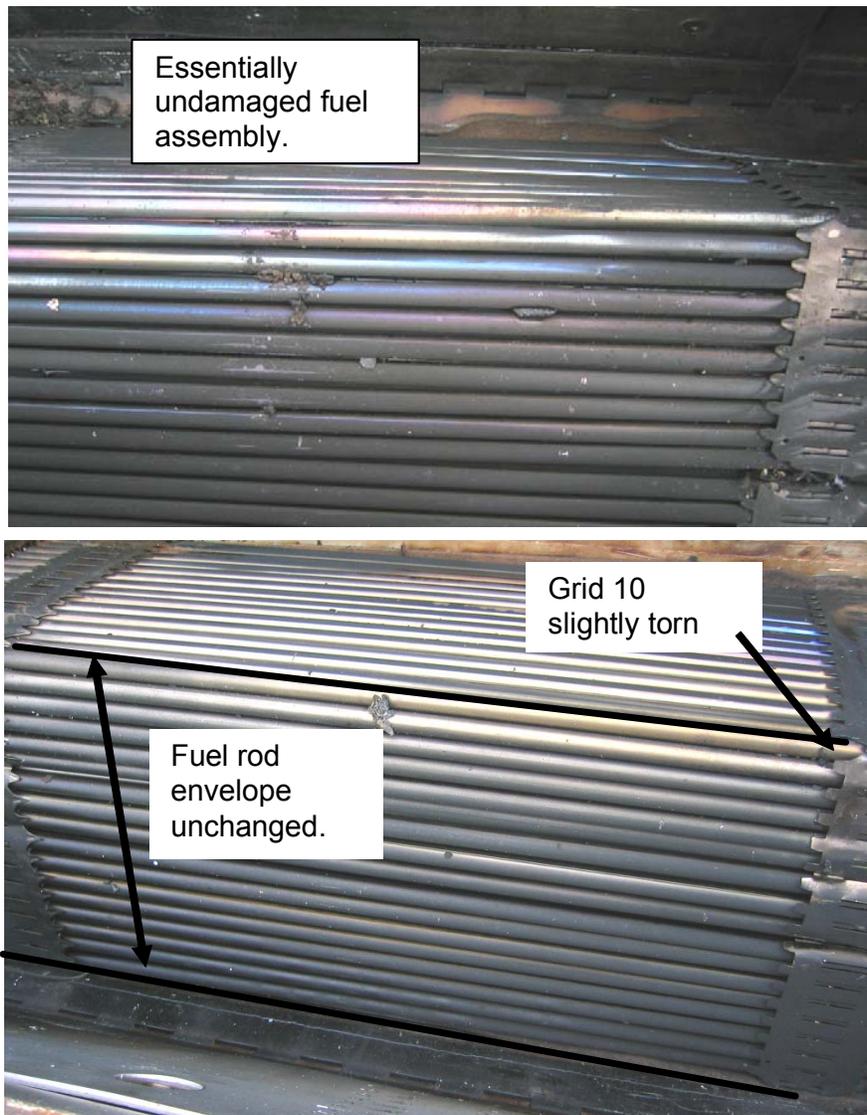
QTU-1 Fuel Assembly After Drop and Burn Tests
